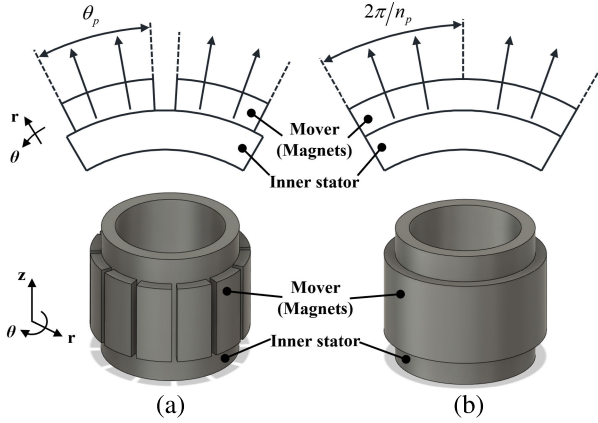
Structure of the (a) segmented mover and (b) ring-type mover.
